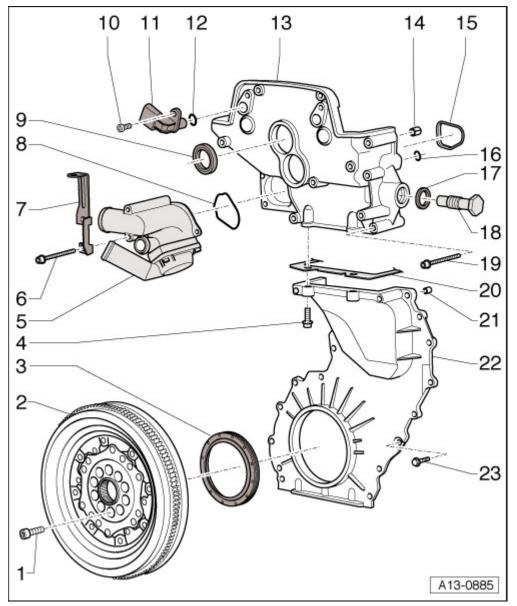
Timing Chain Covers & Dual Mass Flywheel, Assembly Overview Courtesy of AUDI OF AMERICA, LLC
